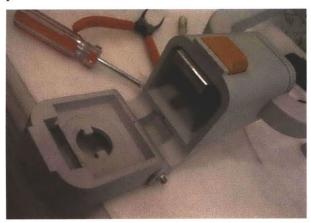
, detailed photo of the RoboScooter G1 head folding mechanism
